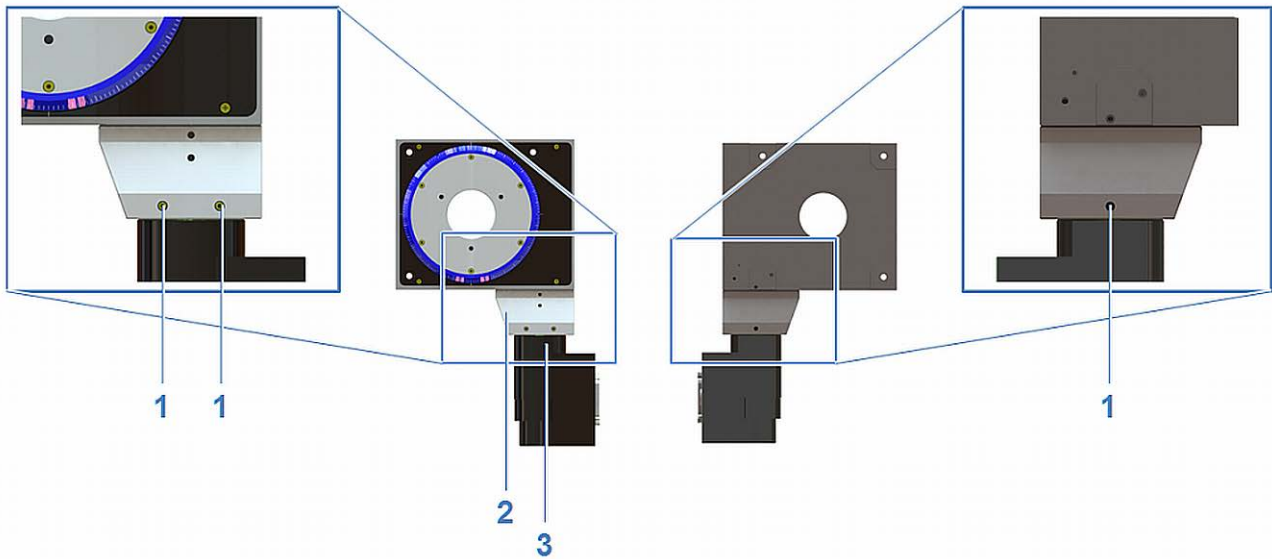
Position of the grub screws on the motor flange (left: top side, right: bottom side)
